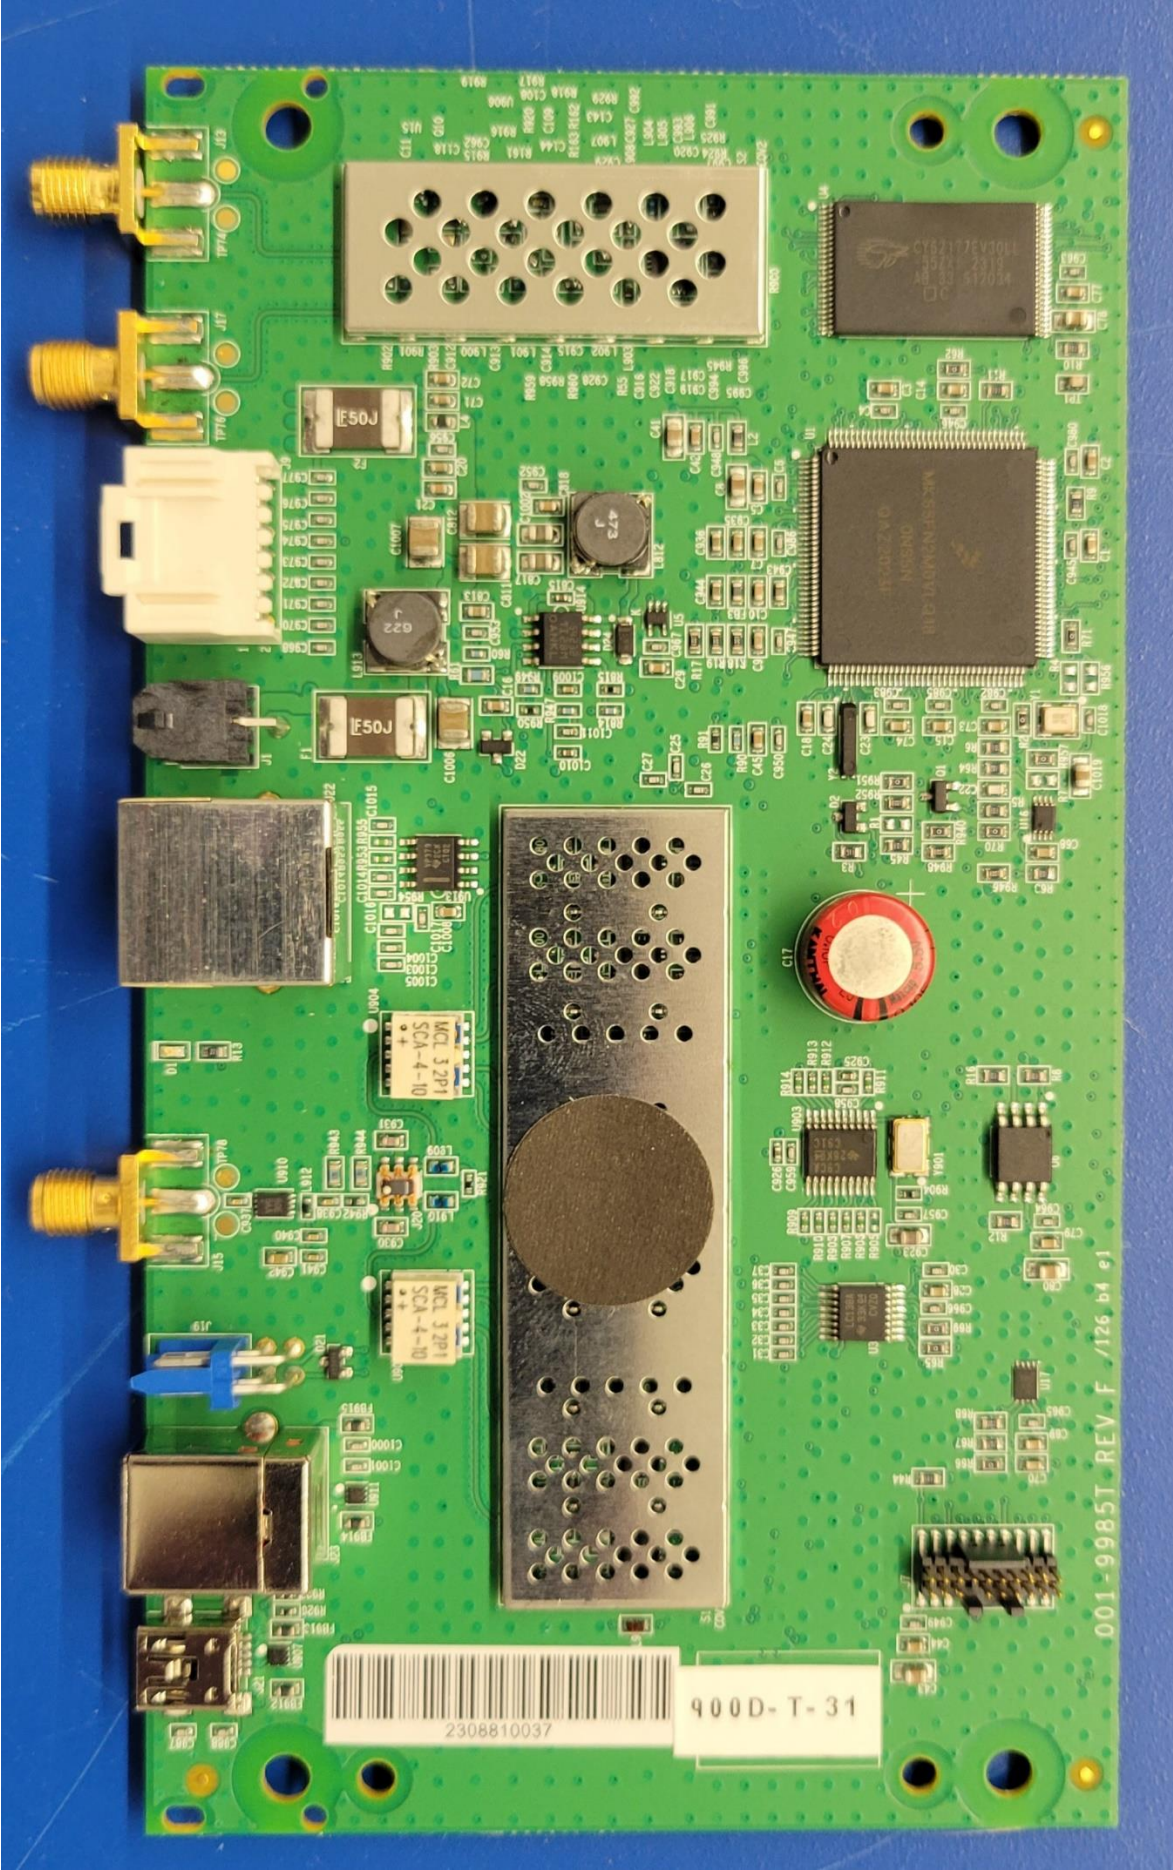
MHz radio Board: Component Side: Cages Removed
